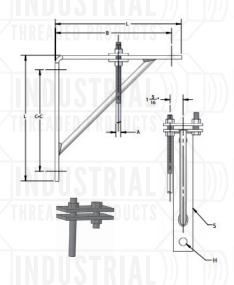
& 820C LIGHT WELDED STEEL BRACKET & CLIP
